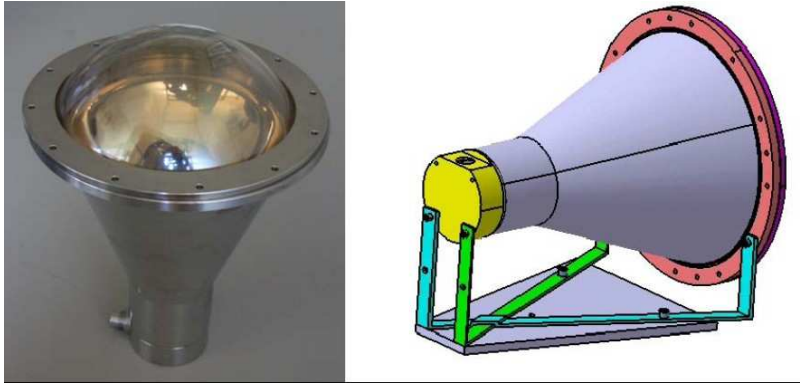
PMT encapsulation and mounting (Drawing P. Guillouët)
